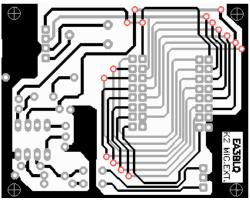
Double sided PCB. Soldering pads are also plated-through.
